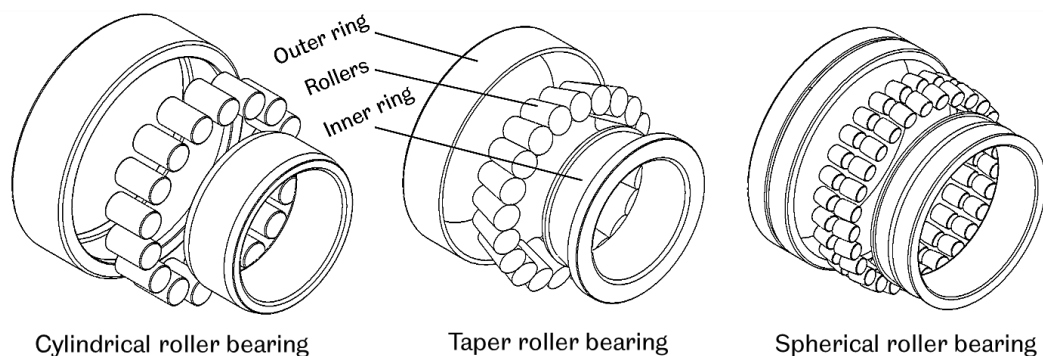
Commonly used roller bearings types in the wind turbine drivetrain
